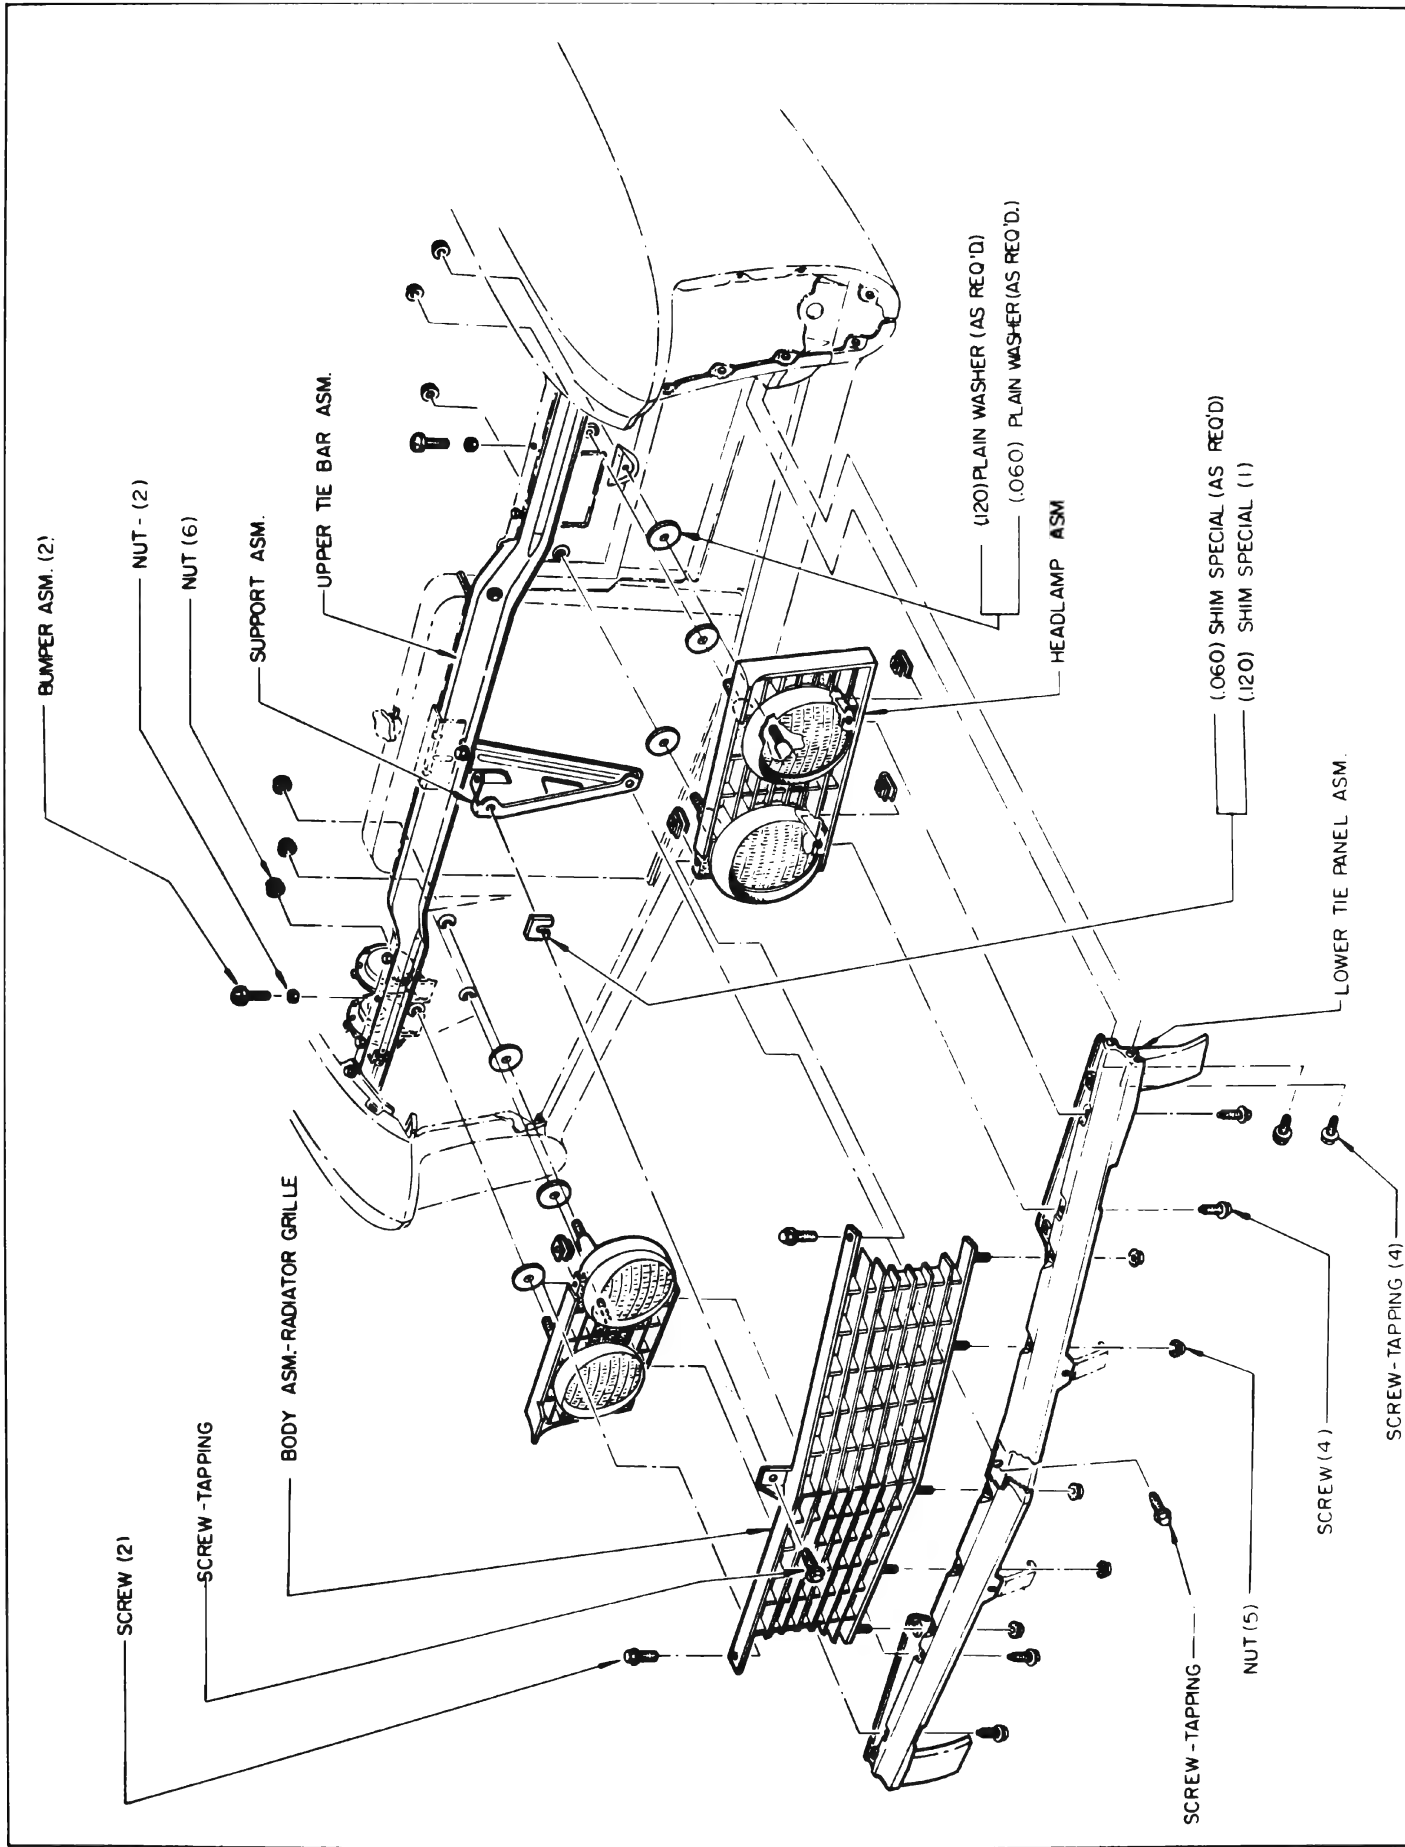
Radiator Grille, Headlamps & Front End Installation—4700 Series
